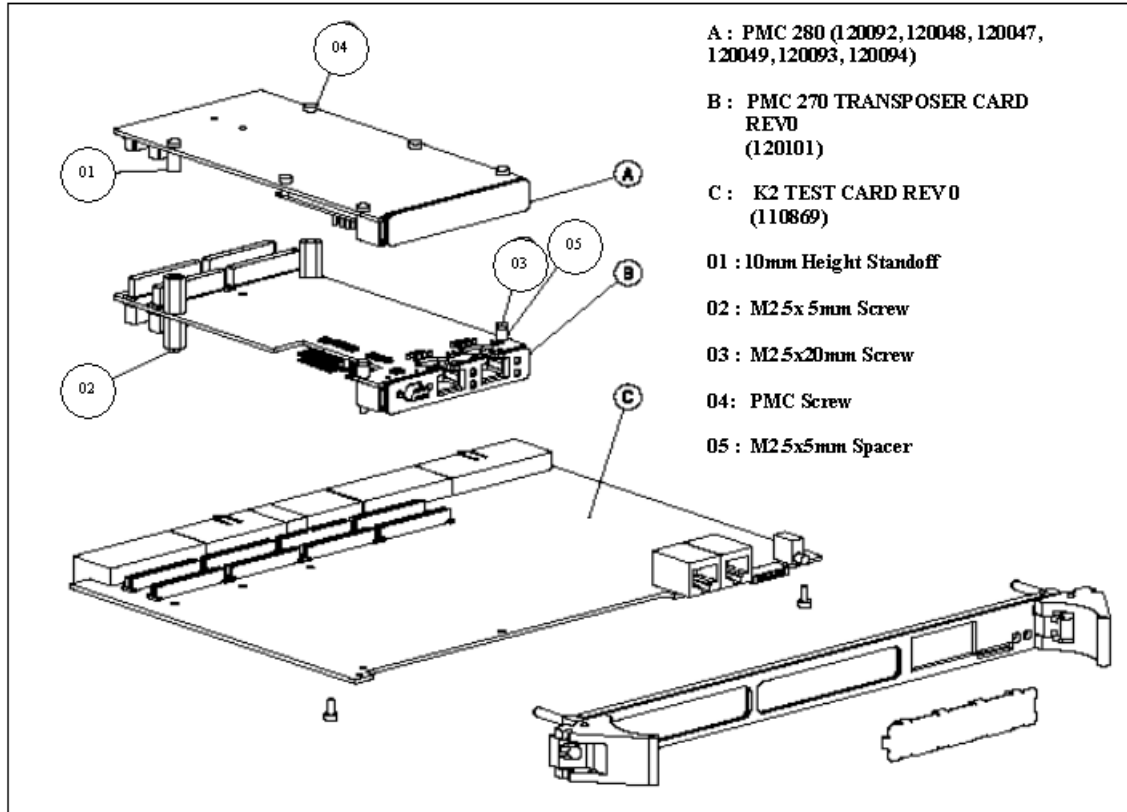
Final Assembly OF PMC280 ON PMC 270 TRANSPOSER CARD, Assembly process - 1
